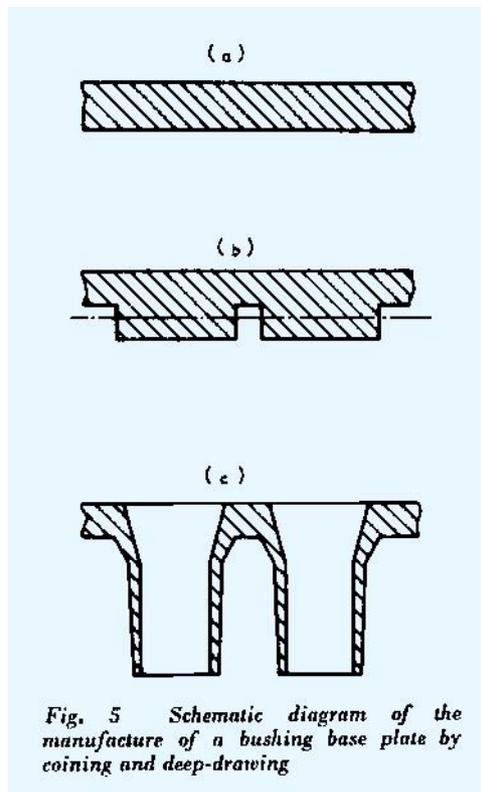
Schematic diagram of the manufacture of a bushing base plate by coining and deep-drawing
